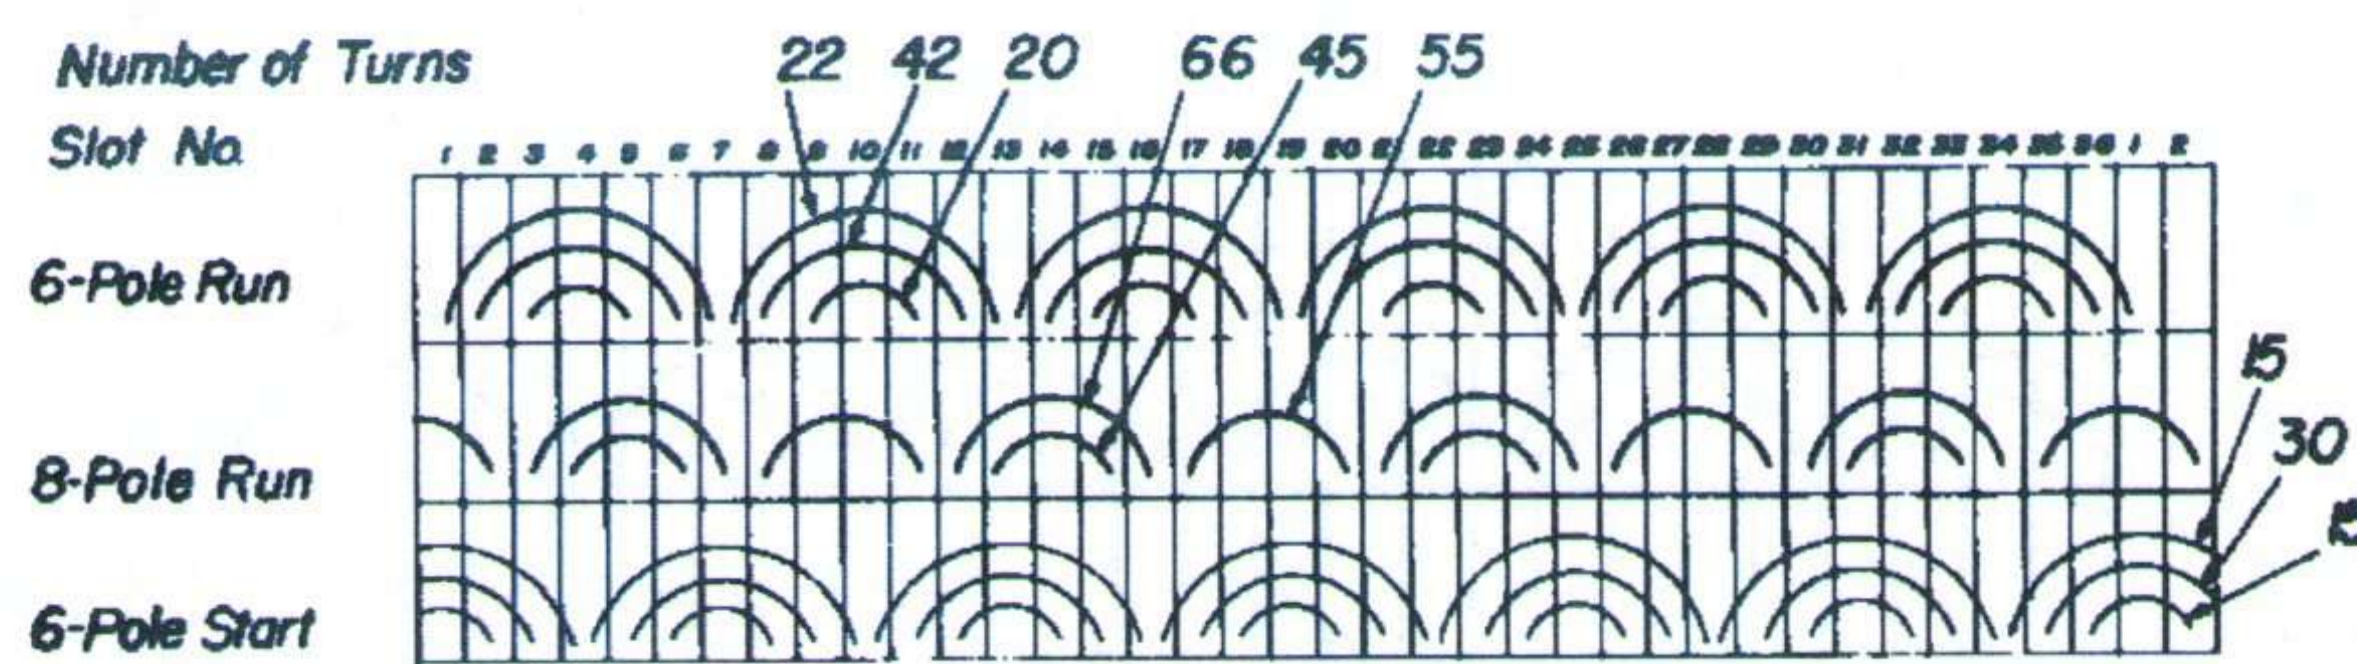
A coil layout of a two-speed, three-winding split-phase motor.
